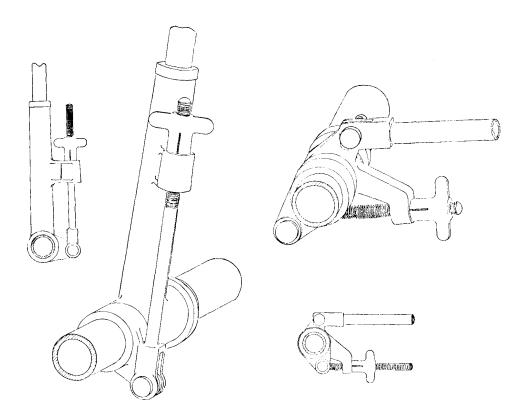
Illustration No. 18.—Views of the brake cross shaft, showing the hand and foot brake adjustments, and the manner in which the cross shaft is supported at one end on a needle bearing.
